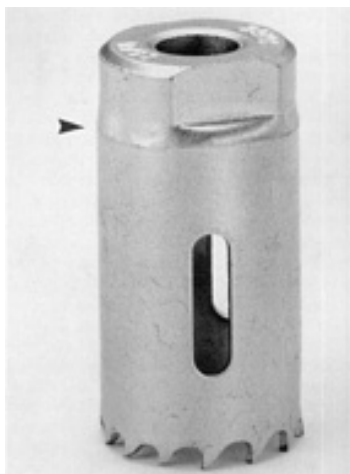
P/M FN-0205 cap nut welded to an alloy steel, hole-saw body without a filler metal by automated GTAW. This single-step joining process also forms the seam of the cylindrical body.
